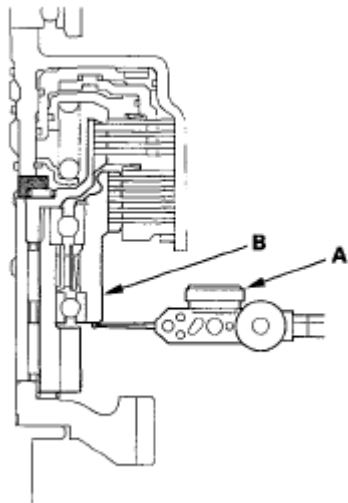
Identifying Dial Indicator On 1st Clutch Hub
